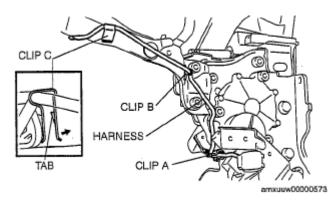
Identifying Wiring Harness Clips Courtesy of MAZDA MOTORS CORP.
